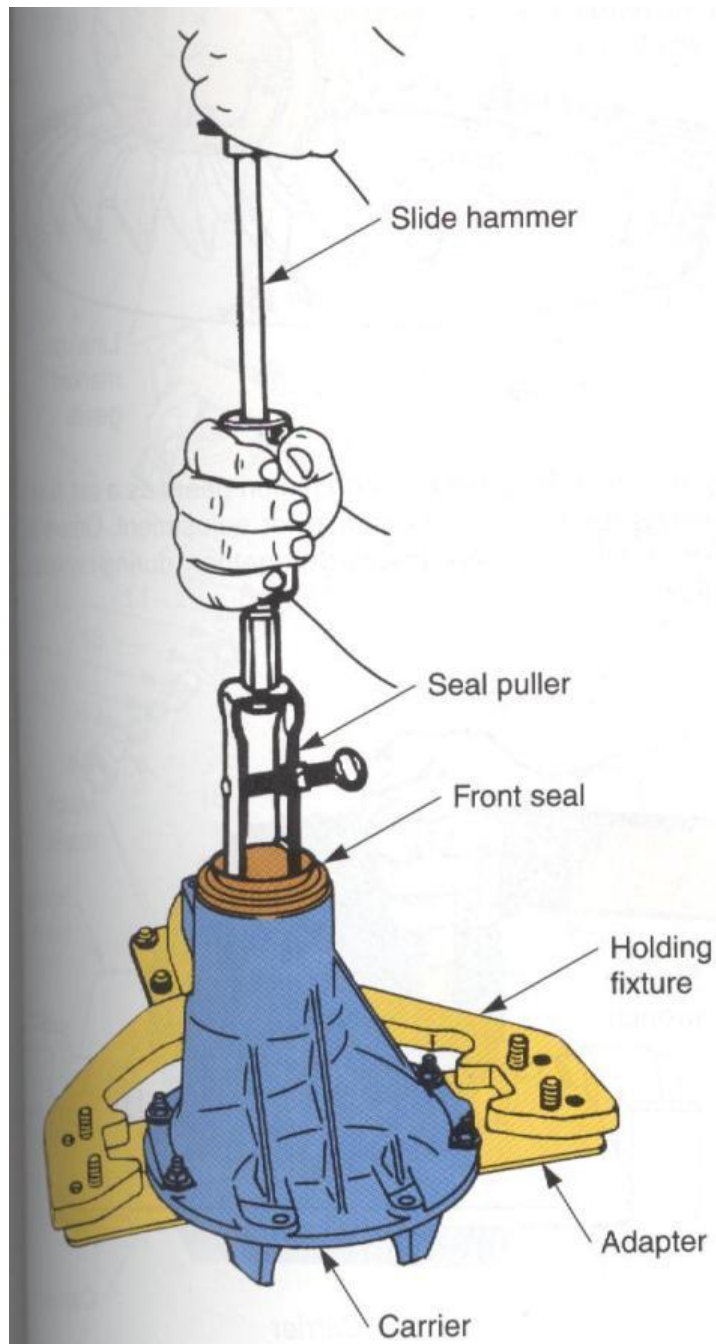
A differential holding fixture allows you to swivel a heavy differential carrier into different positions while holding. Here, a pinion seal is being removed.
